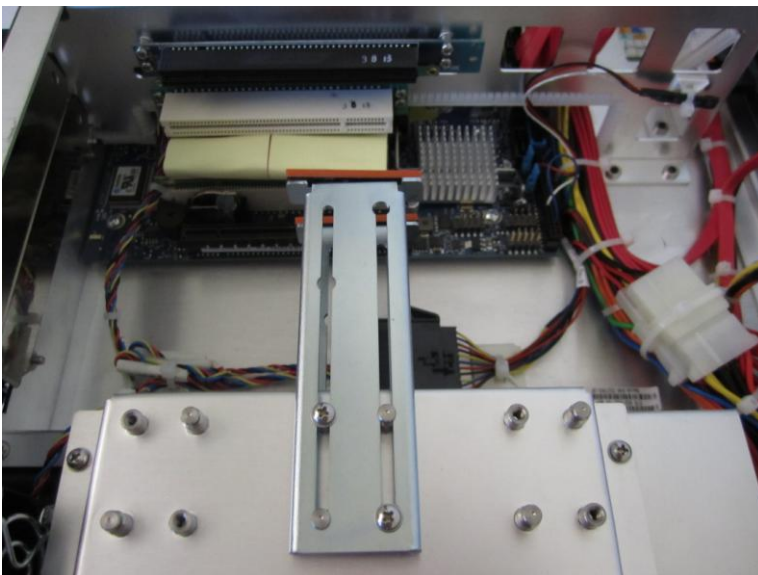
The 2 expansion card brackets may be adjusted as needed
